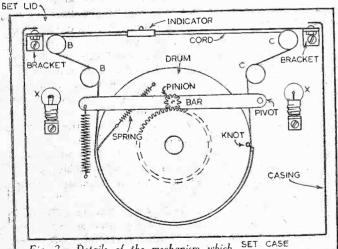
Details of the mechanism which is mounted on the side of the receiver casing.
